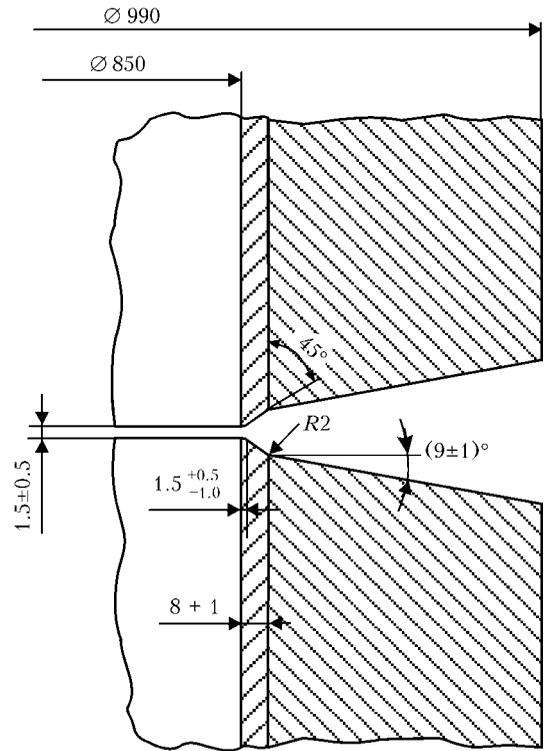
Schematic of edge preparation for welding from one side of pipe joint from clad low-alloyed steel
